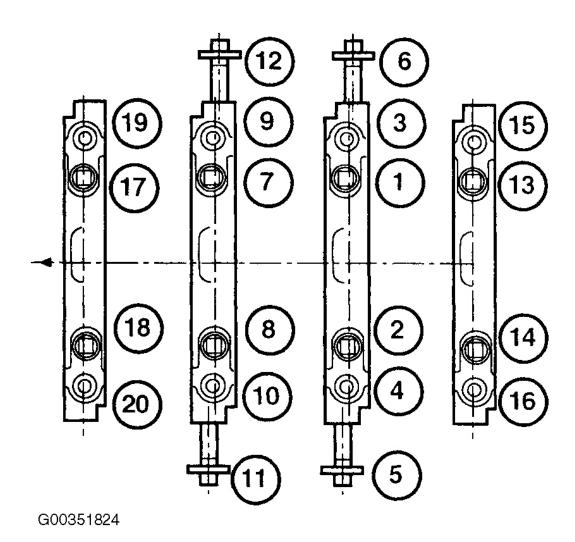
Crankshaft Main Bearings Cap Bolt Tightening Sequence
